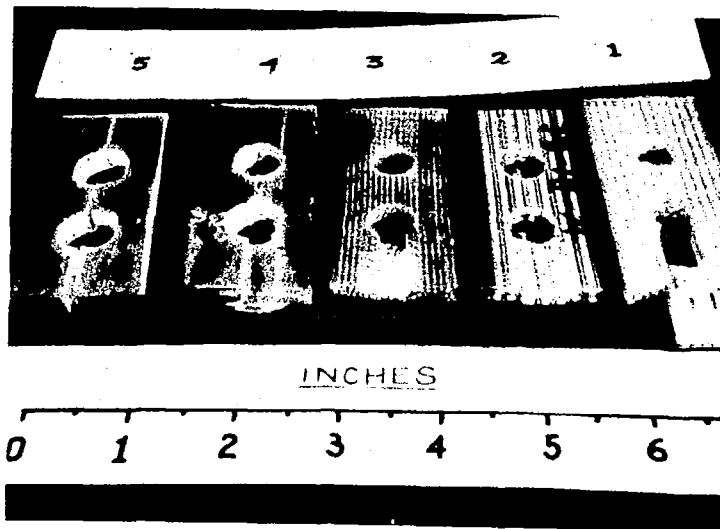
Fracture-Type of 5 Shear-Bearing Joint Test Specimens
